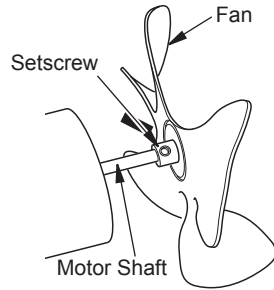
Fan, Motor Shaft, and Setscrew Location
